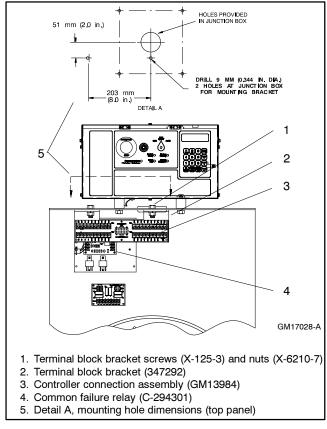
Terminal Block Bracket and Controller Connection Assembly Mounting (350/400 kW)
